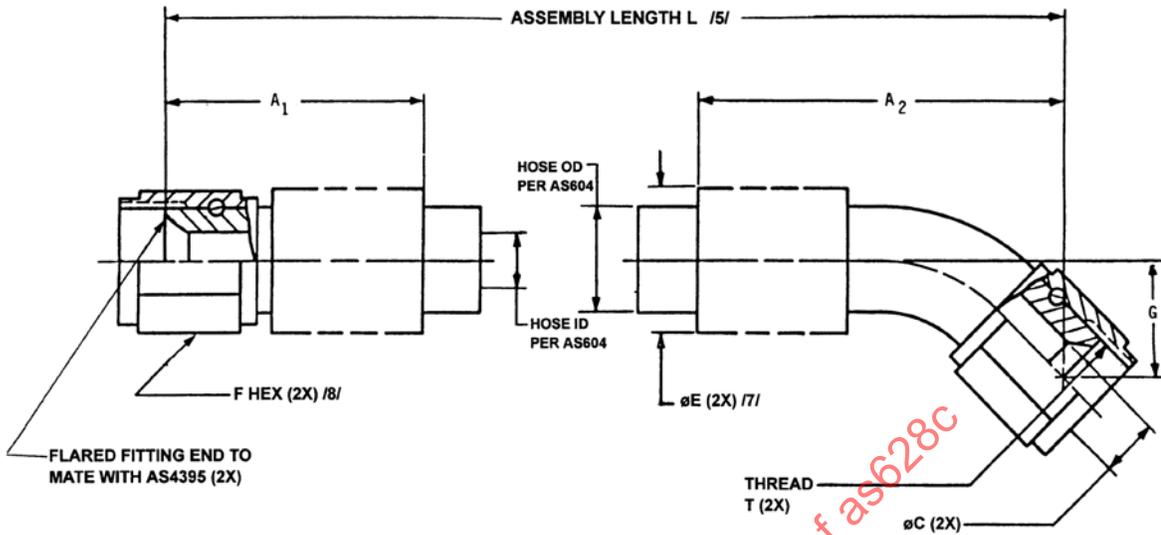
HOSE AND FITTING DIMENSIONS
